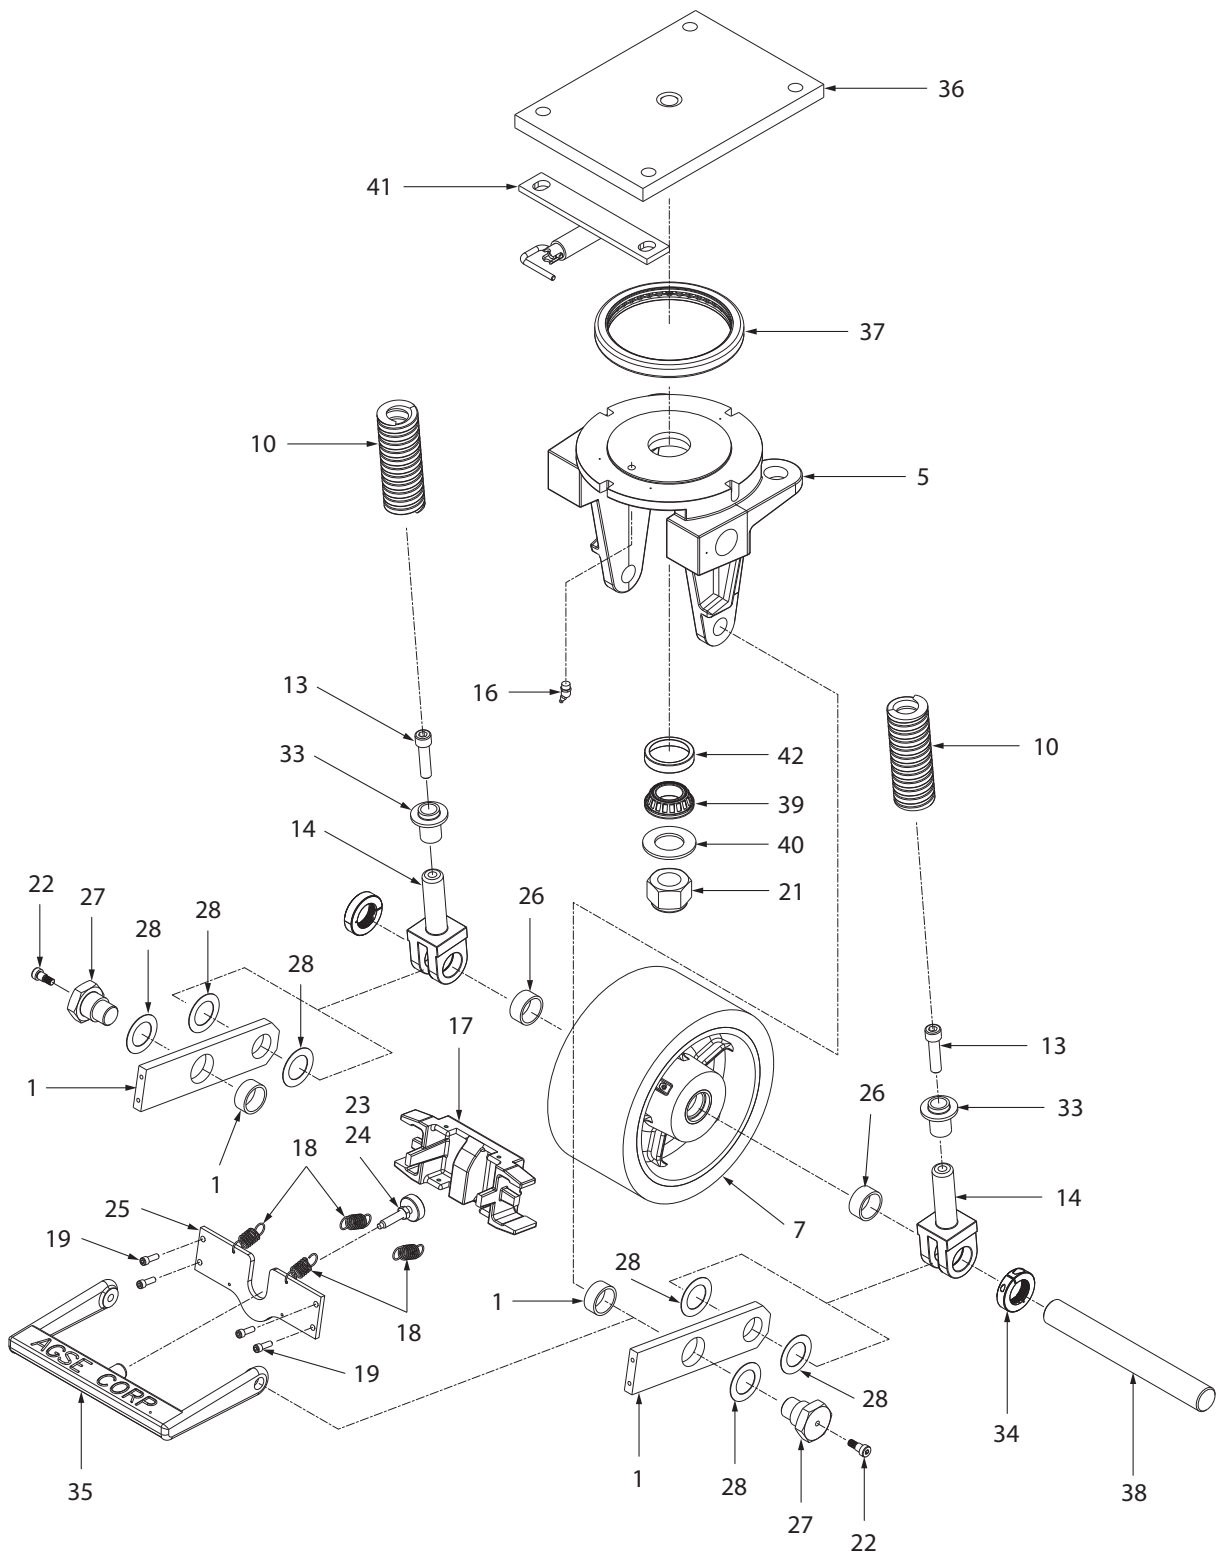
AM-2079-1/-2 Caster Assembly
